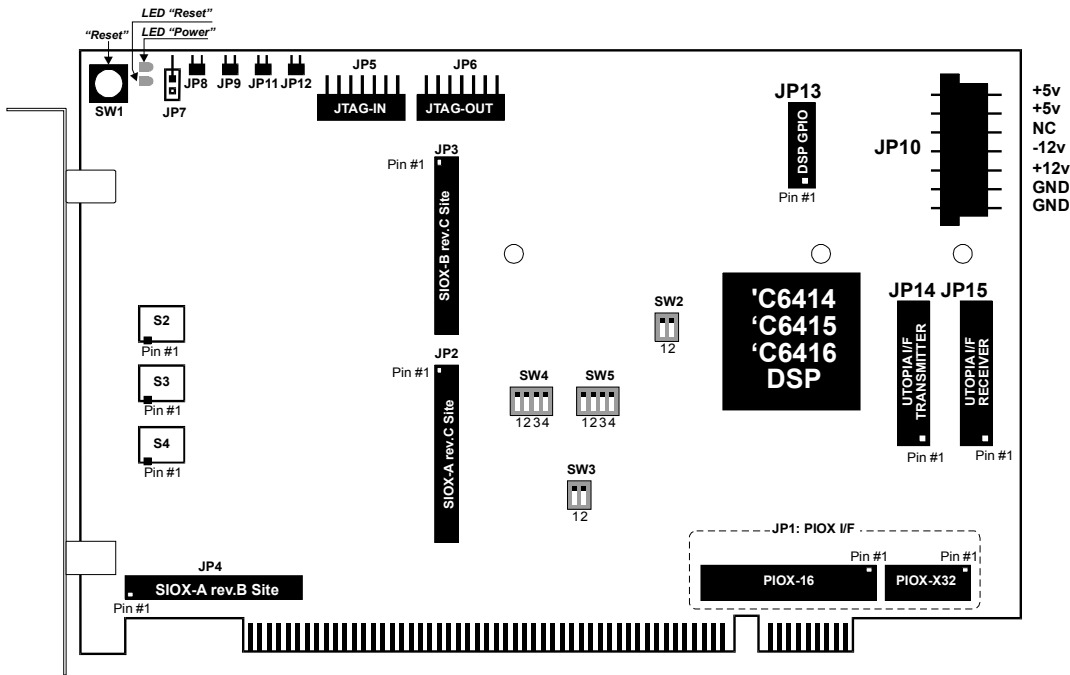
On-board layout for *TORNADO-P64xx* rev.1B board.
